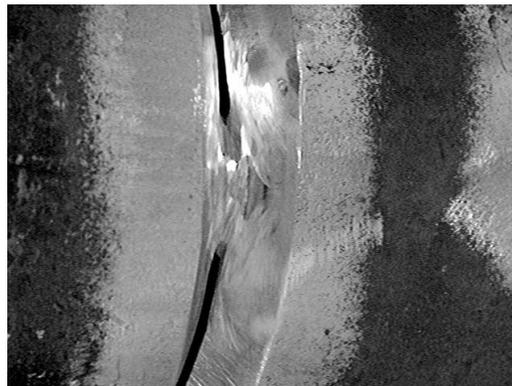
Tack Weld after post-weld cleanup.
